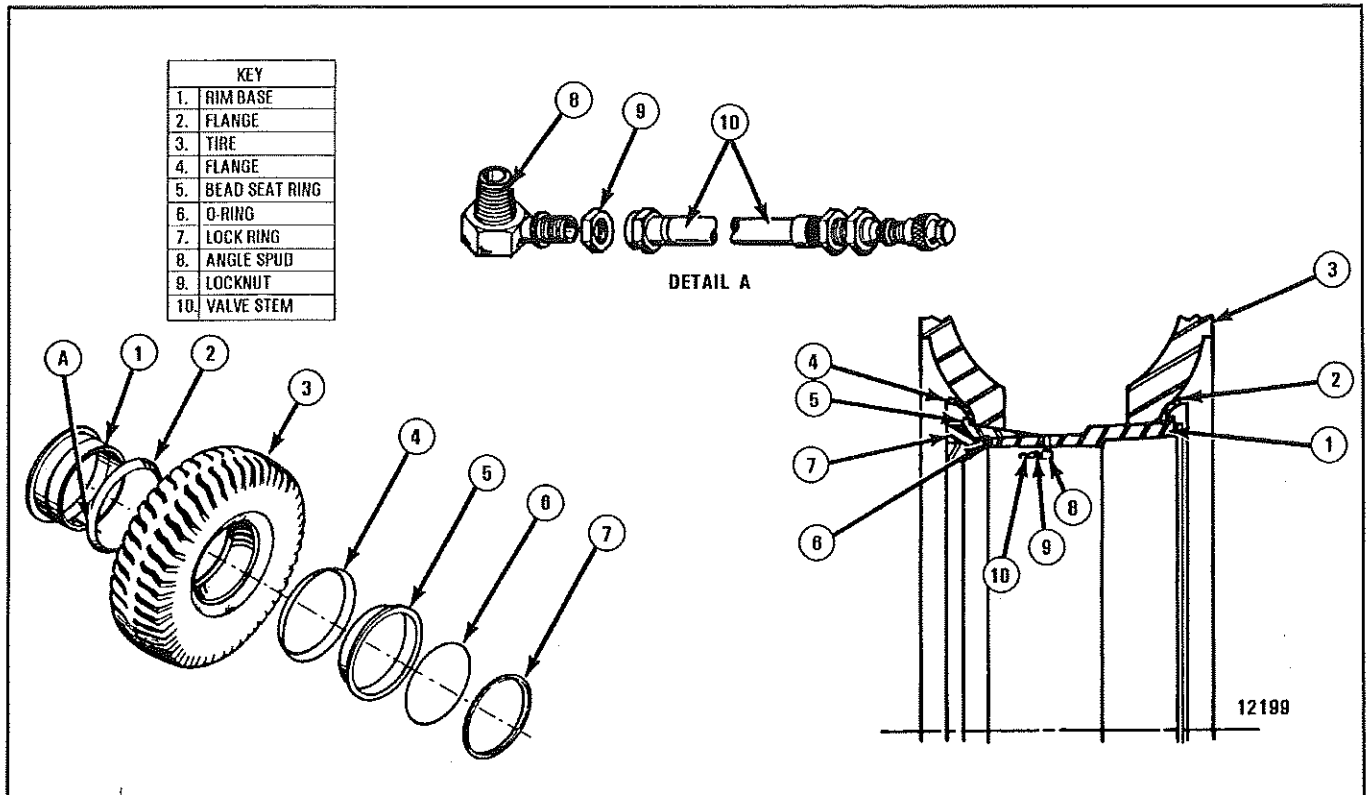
TYPICAL FRONT TIRE AND RIM ASSEMBLY (12199)
